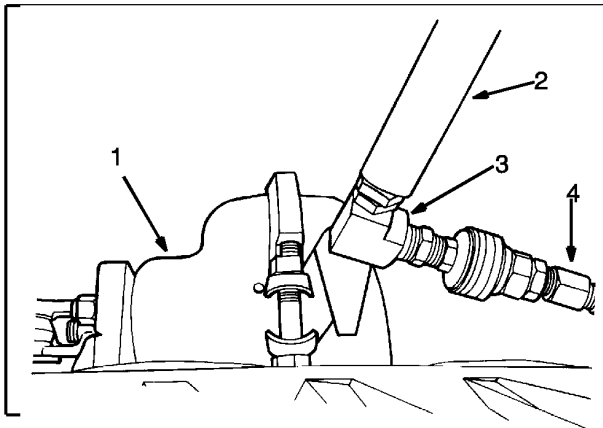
Test Gauge Hose Connection (At Service Brake Chamber)
